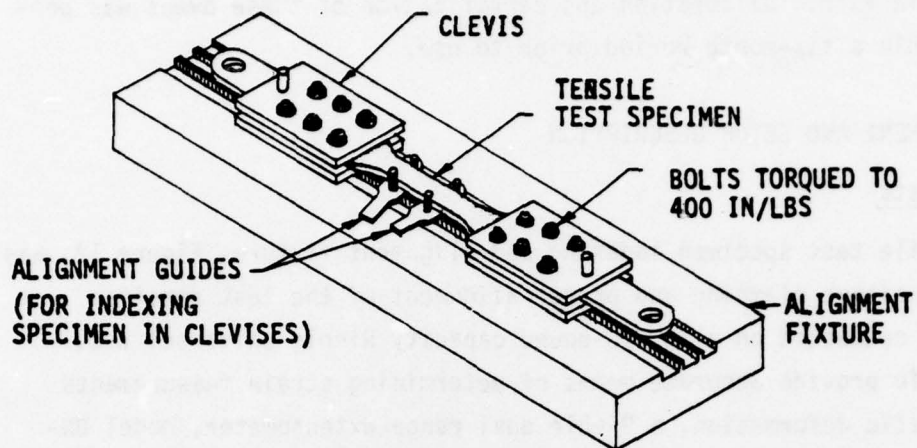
Tensile Test Specimen Indexing and Alignment Fixture.
